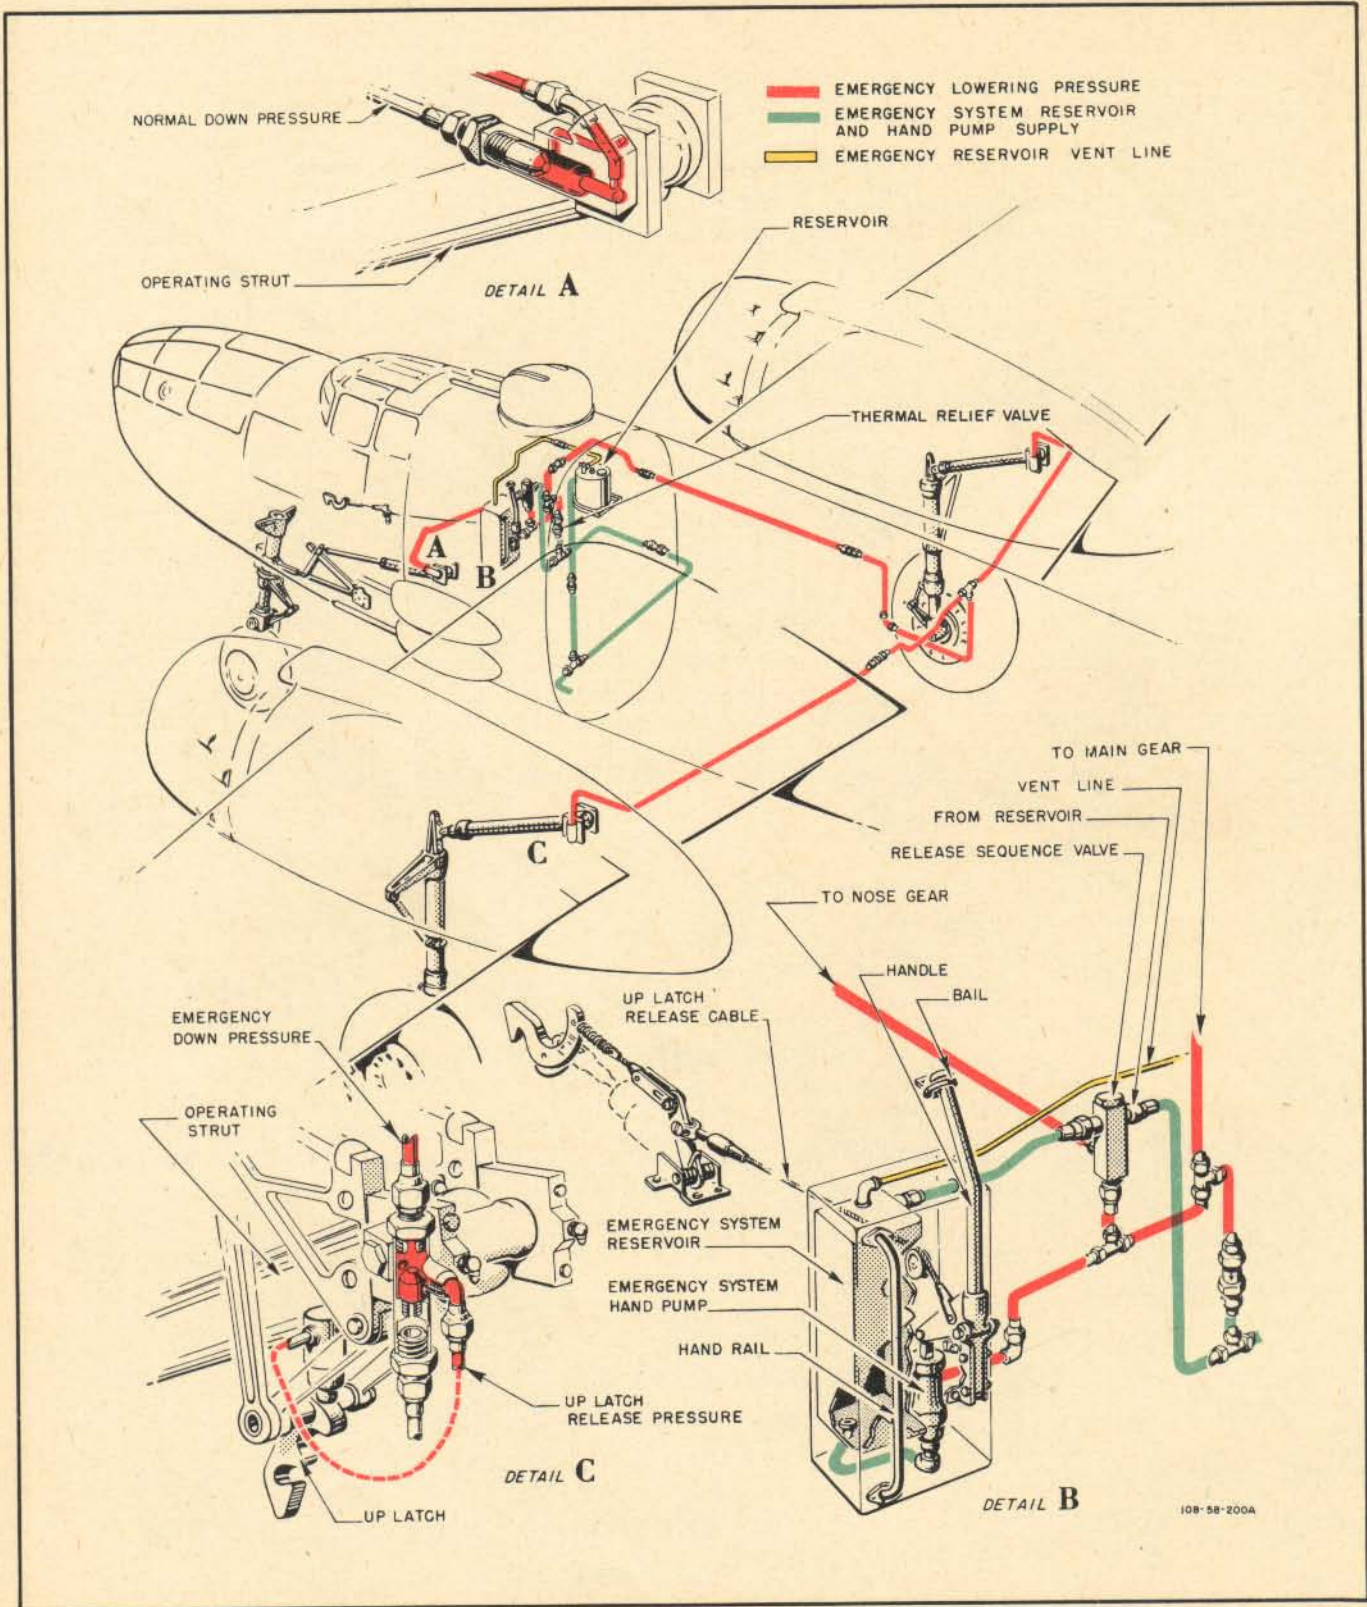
Landing Gear Hydraulic Emergency Lowering System
